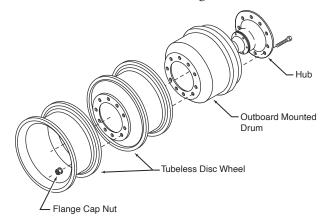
Removal of Tires and Hub Piloted Disc Wheels
